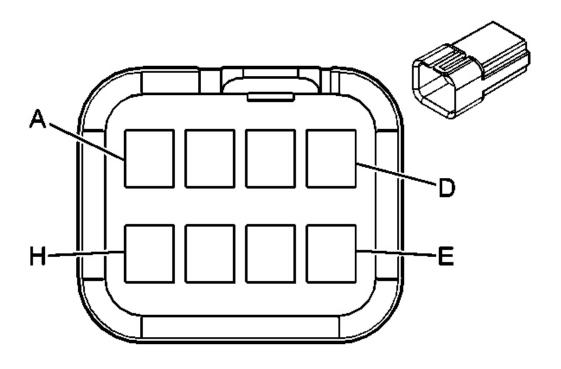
Lumbar Adjuster/Heater Switch - Passenger (AG2) Connector End Views Courtesy of GENERAL MOTORS CORP.
